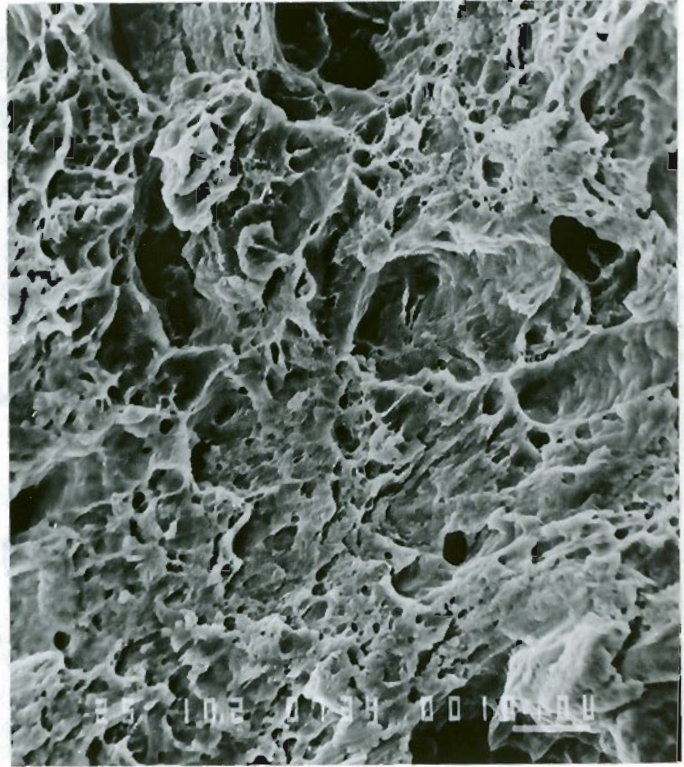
Flame cut surface of fractured tensile specimen for A572 steel flame cut at faster cutting speed.
